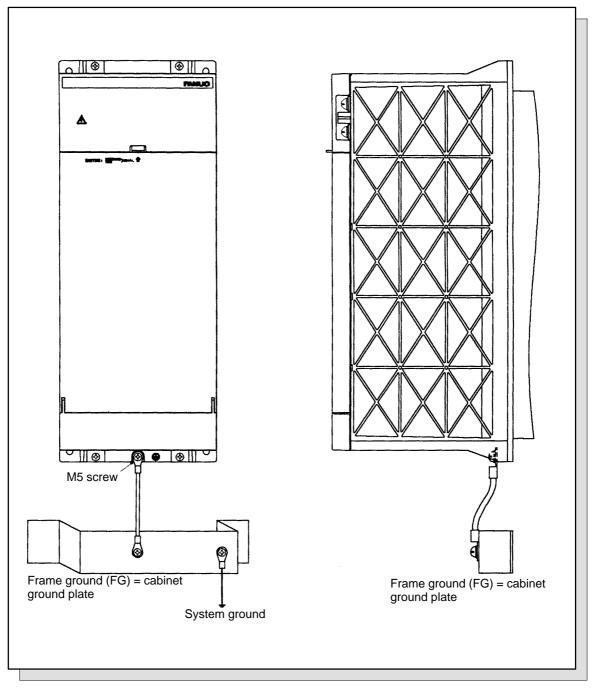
(p) Ground Cable Connection (PSMC-45HV)
